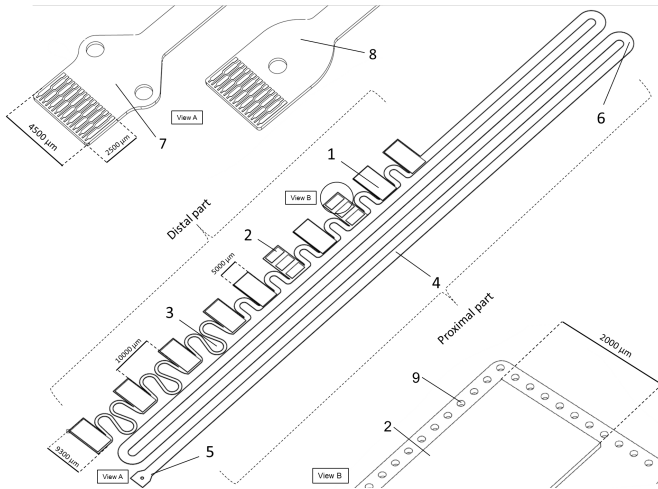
FPCB design in planar form containing ring electrodes (1), split electrodes (2), omega shapes (3), tail (4), single hole connector (5), bending segments (6), double hole connector (7), single hole connector (8) and micro hole structure (9).
